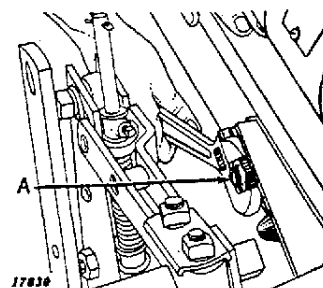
Detaching Cultivator with Quik-Tatch Frame
